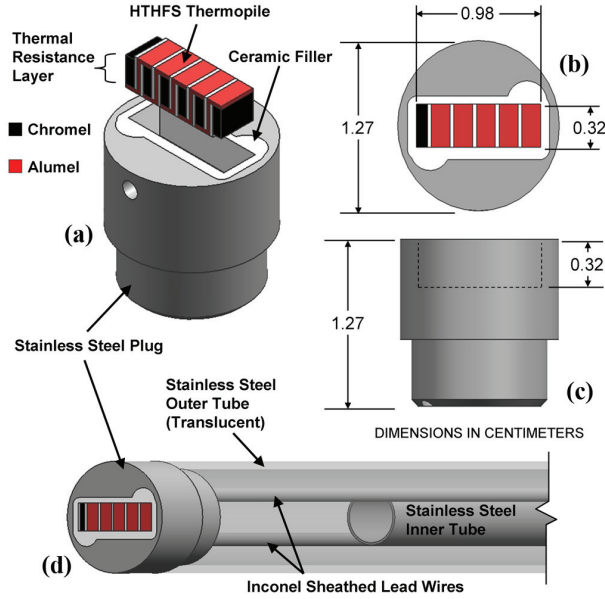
Air cooled HTHFS drawing showing labeled components and important dimensions. Clockwise from top left: (a) isometric exploded view of thermopile and stainless steel plug, (b) top view of sensor assembly showing sensing area, (c) side view of plug showing thermopile length (in direction of heat transfer) and plug length, and (d) air cooled HTHFS assembly view showing electrical and cooling tube routing.
